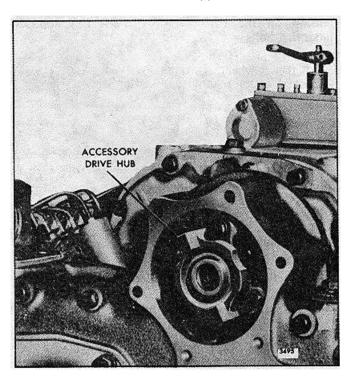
Accessory Drive Attached to Blower Drive Gear
